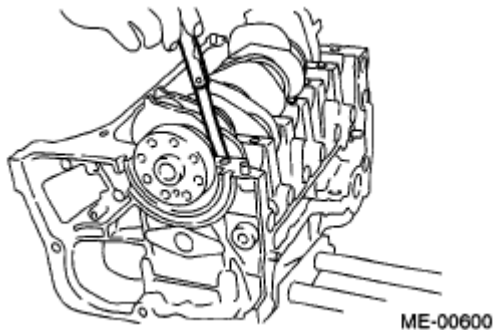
Measuring Thrust Clearance Of Crankshaft At Center Bearing
